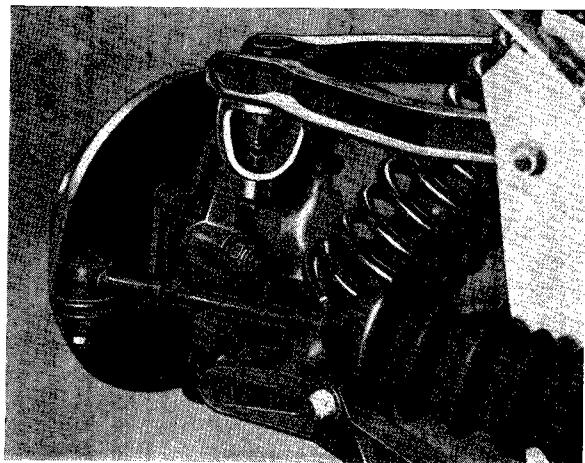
Using tool No. S.166A to release top ball joint from vertical link
